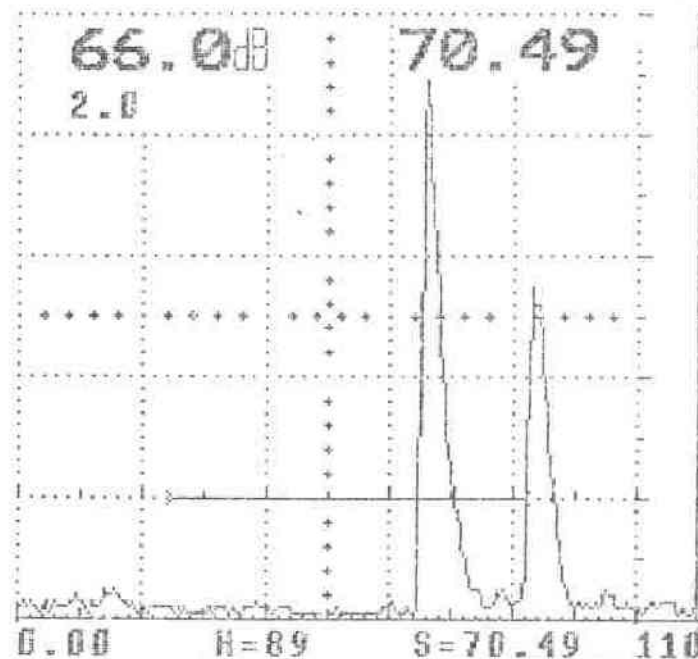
Echo image of butt-welded rail with incomplete penetration.
